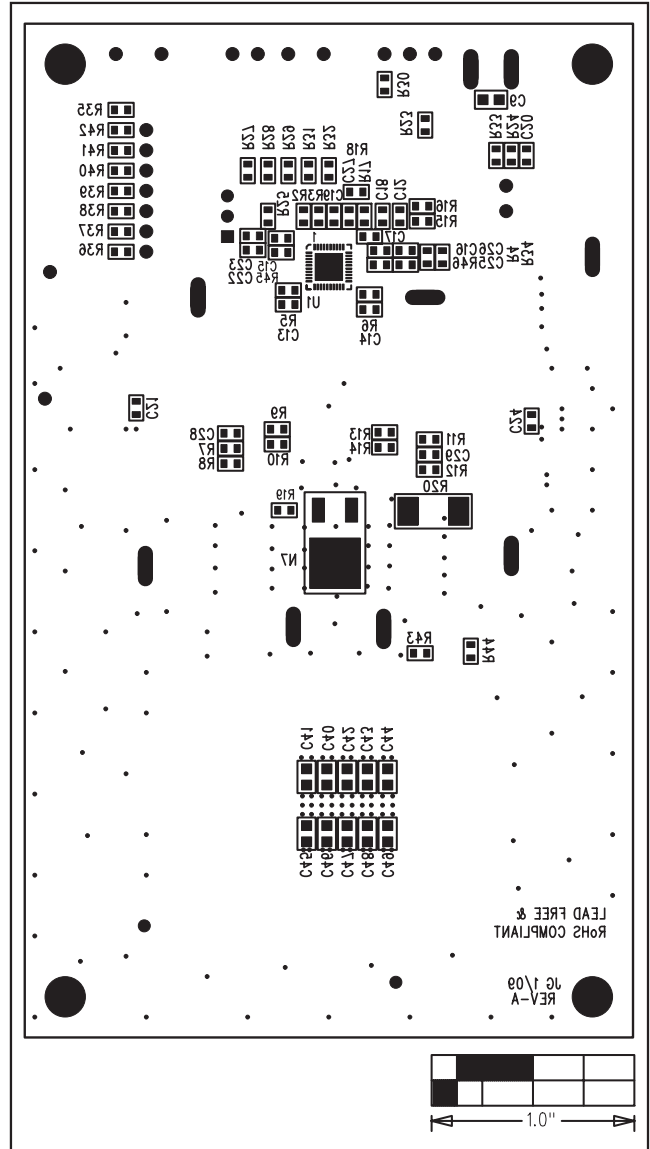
MAX17021 EV Kit Component Placement Guide—Solder Side
